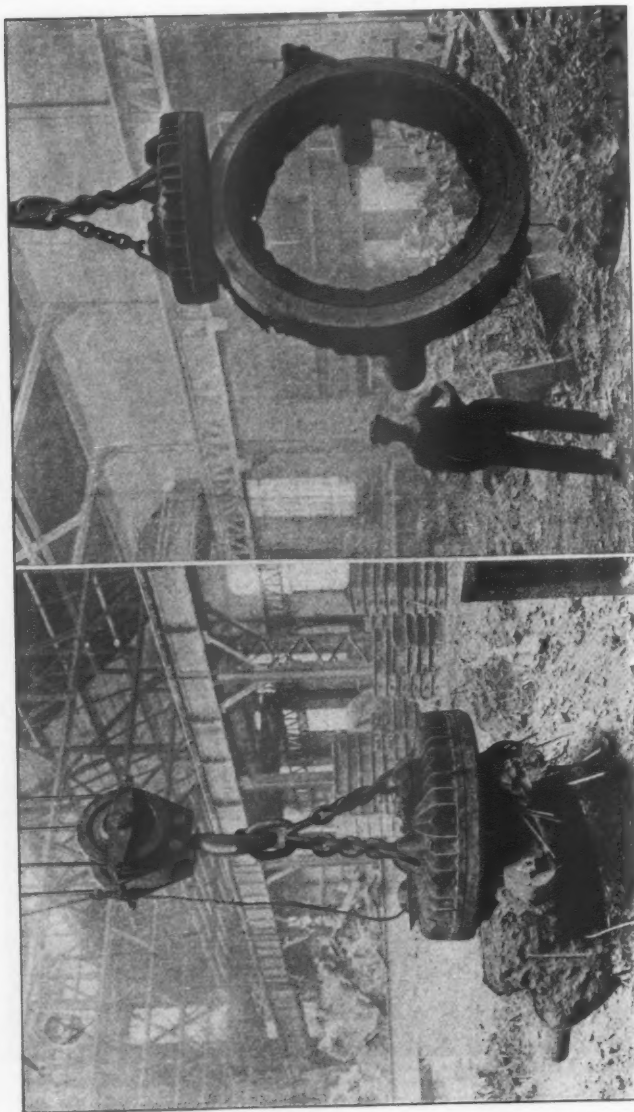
HANDLING HOT CASTINGS BY MAGNET
